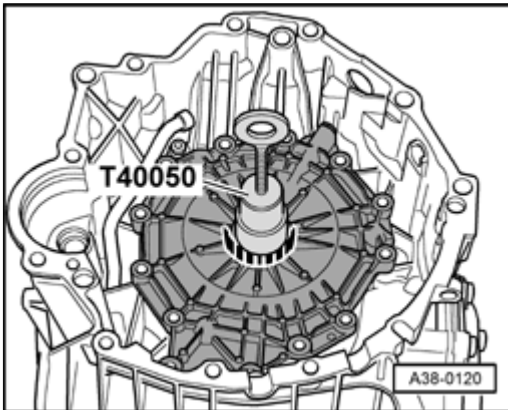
Using Back And Forth Rotating Motions On Input Shaft Until Clutch Discs Of Reverse Gear Clutch Have Engaged
